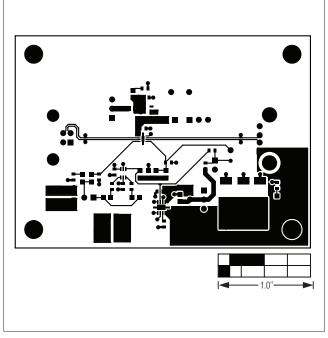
MAX14566E EV Kit PCB Layout—Component Side
